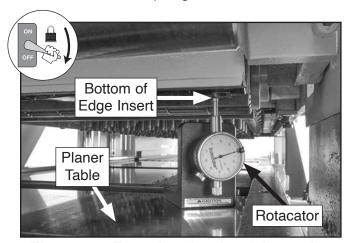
Example of headstock lowered to just touch Rotacator plunger.
